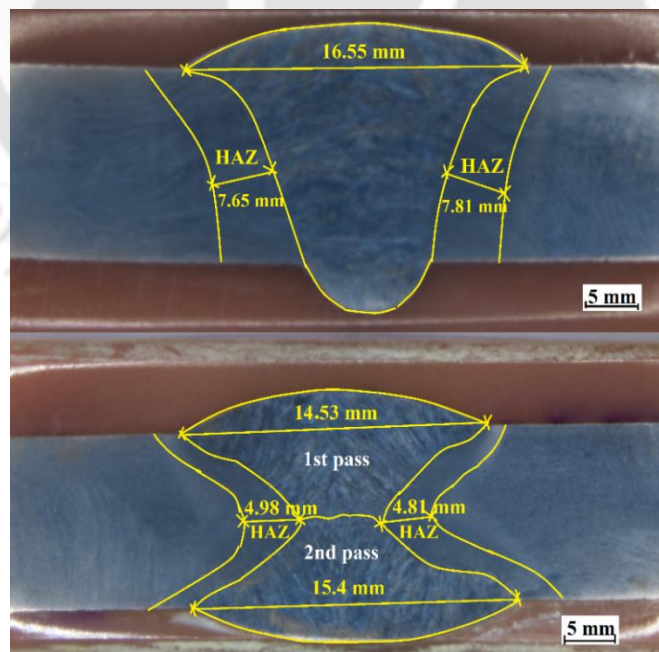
Cross-sectional view of square butt single and double-side single pass weld joint samples
